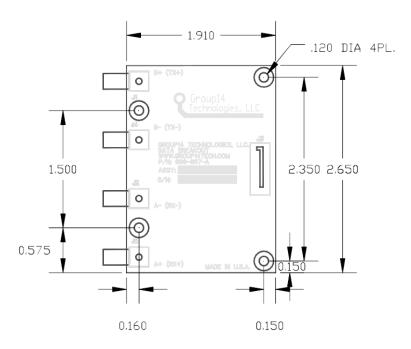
SATA Breakout Physical Dimensions (Dimensions are in Inches)
